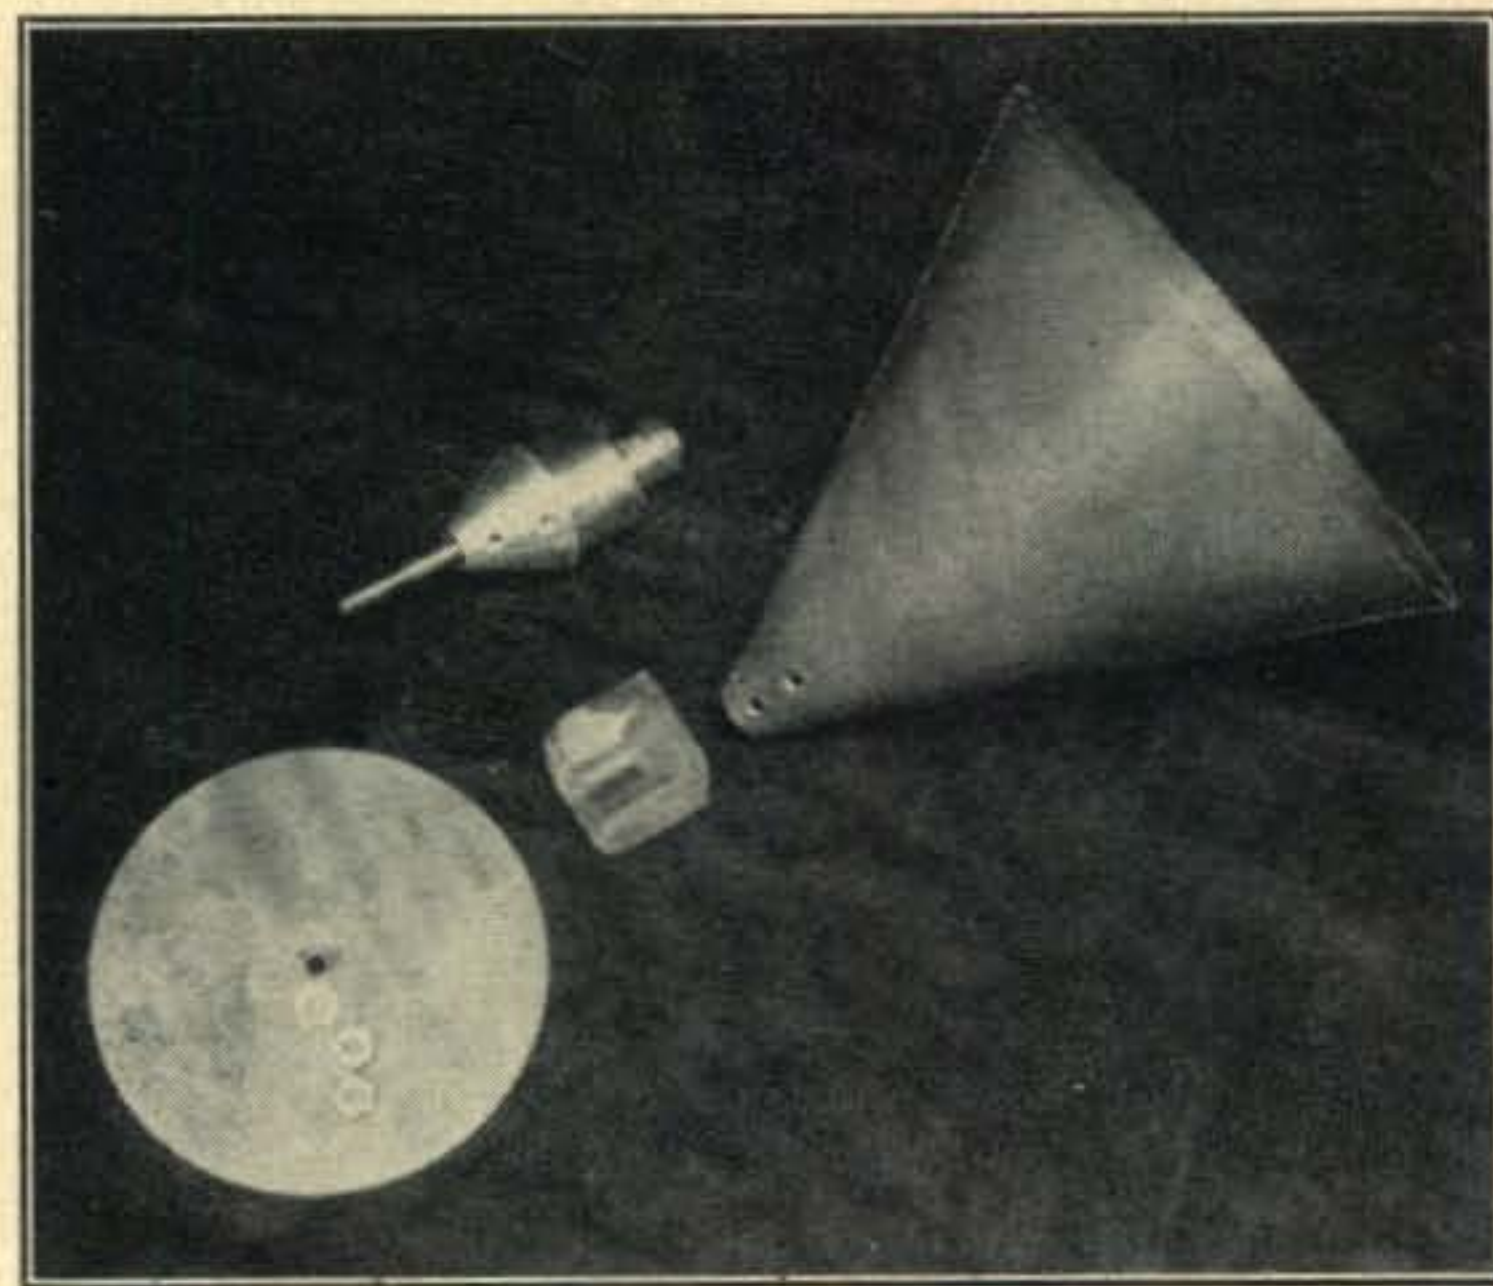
An "exploded" view of the model B discone illustrating the simplicity of construction. A special flange, not shown, was welded to the base of the antenna for ease in mounting to an automobile roof.
